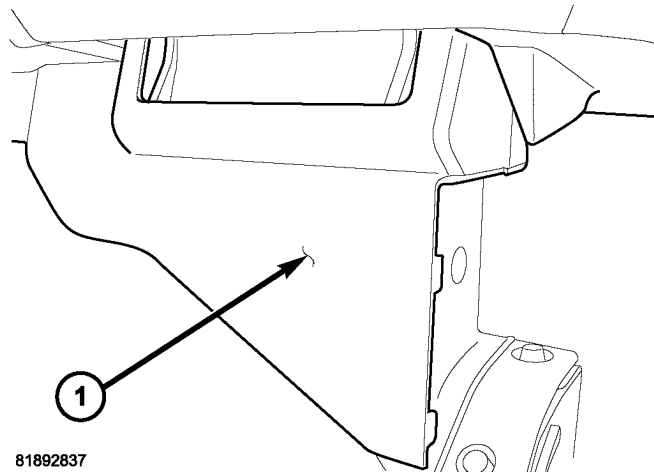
FRONT TUMBLE MECHANISM SHIELD
